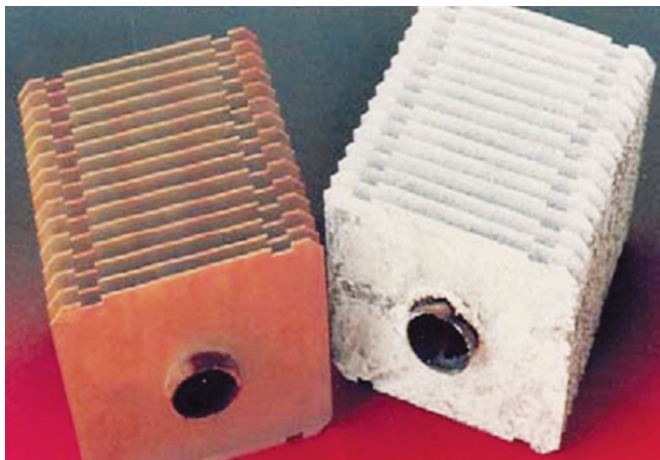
Coils exposed to Salt Spray Test as per ASTM B117.85 for 360 hours; corrosion on the untreated coil would shorten equipment
